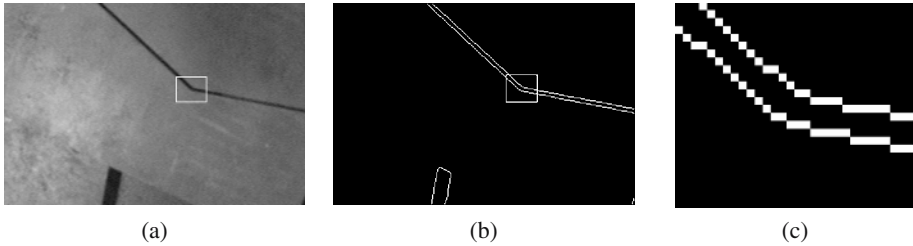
Kink line welding seam. (a) original image; (b) edge image of (a); (c) local details about the edge of kink mark in (b).
